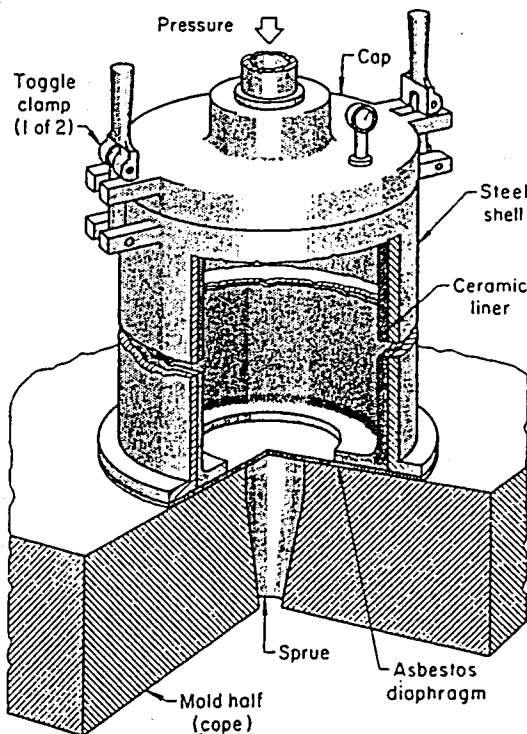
Cylinder for pouring a casting with pressure assist [4]
